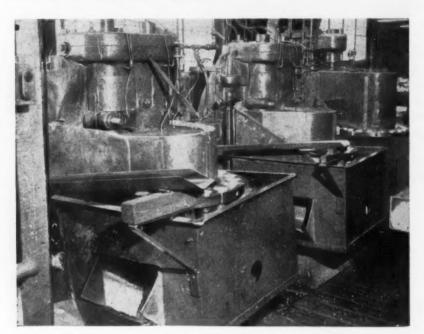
Roughing cuts across heads of the pistons are made by these 16-station milling machines. Conveyor delivers pistons to bin at rear of millers.
